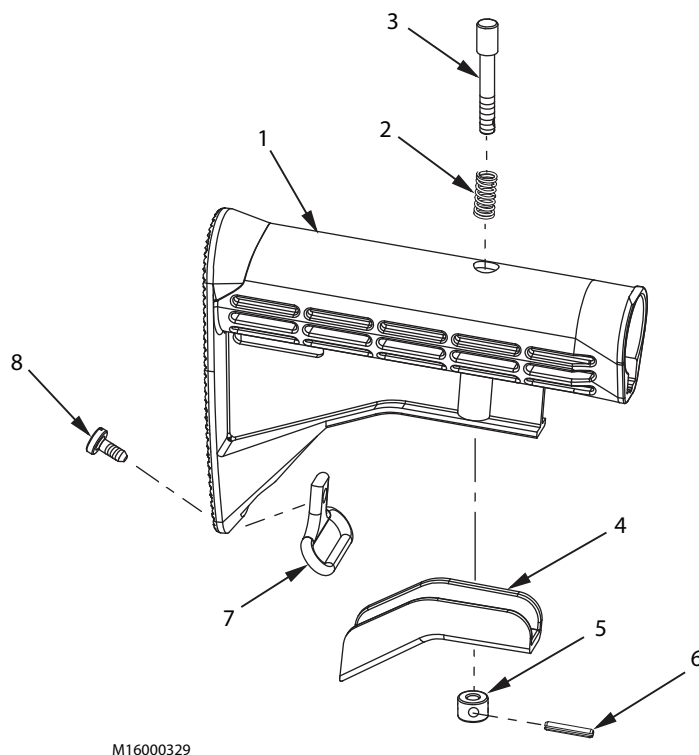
Disassembly of Buttstock Assembly (Carbine).
